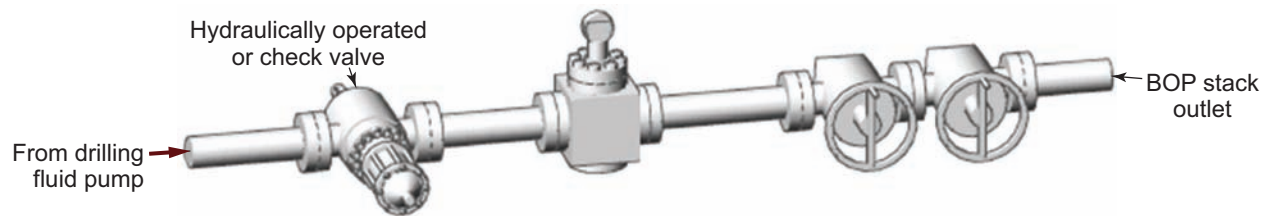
Example Kill Line Assembly for 5K Rated Working Pressure Service—Surface BOP Installations
